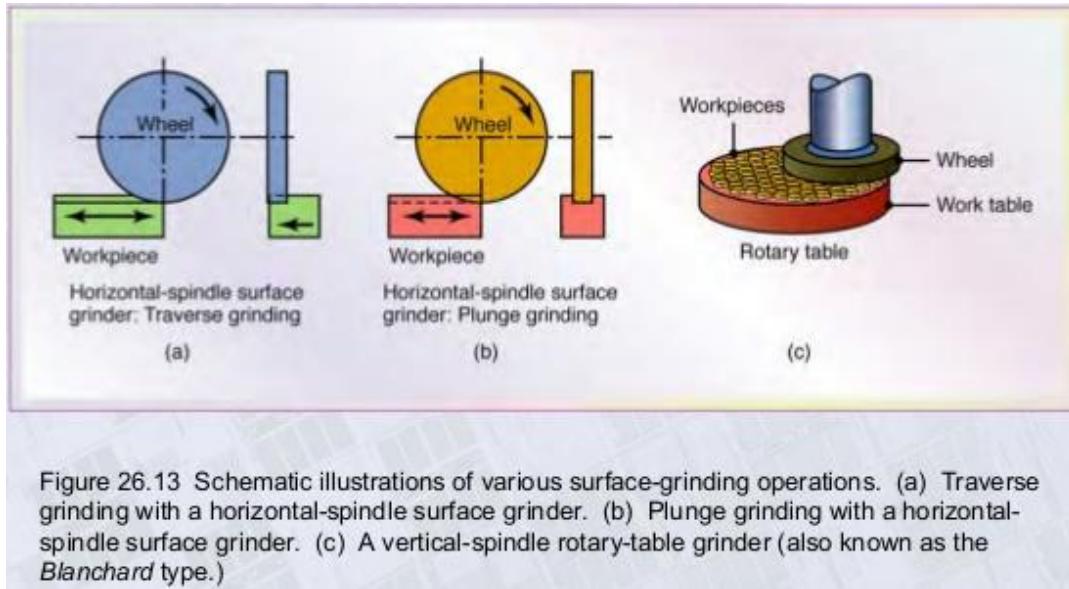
Schematic illustrations of various surface-grinding operations. (a) Traverse grinding with a horizontal-spindle surface grinder. (b) Plunge grinding with a horizontal-spindle surface grinder. (c) A vertical-spindle rotary-table grinder (also known as the *Blanchard* type.)
